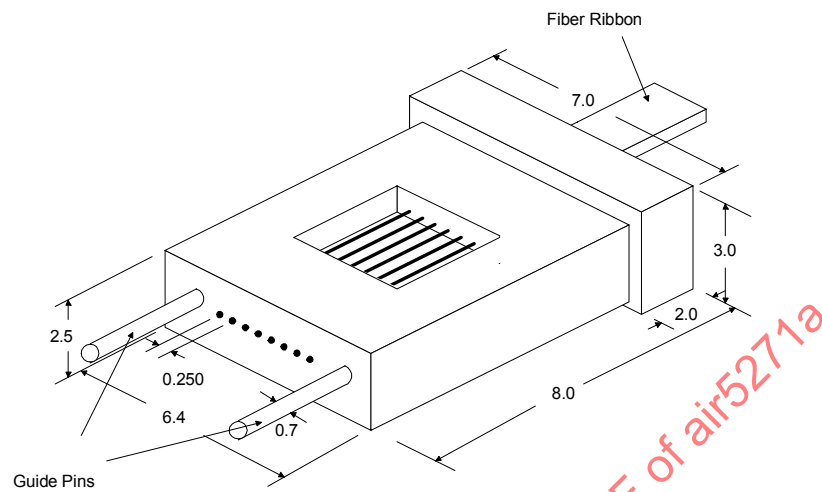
MT Optical Connector (Dimensions in mm)
